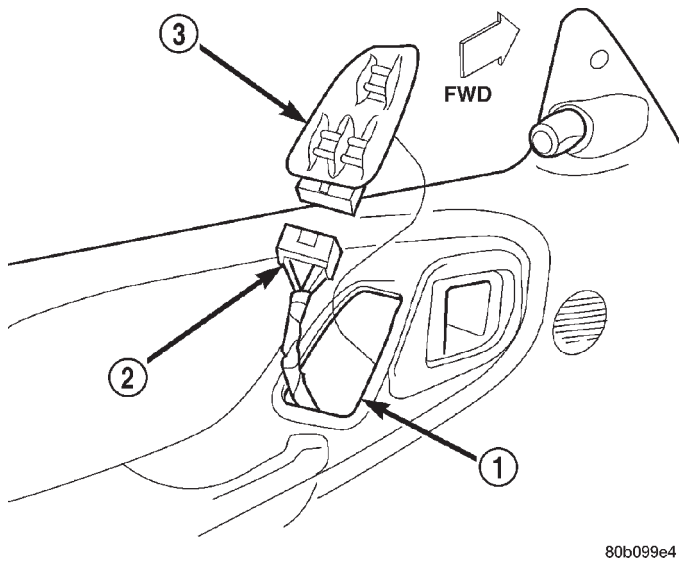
Power Window and Lock Switch and Bezel Unit Remove/Install - Conventional Cab and Club Cab
